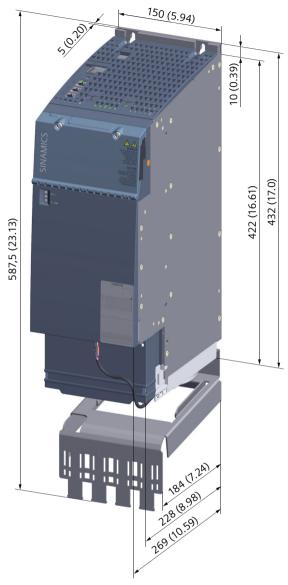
Dimension drawing of Smart Line Modules 36 kW and 55 kW, all dimensions in mm and (inch)
